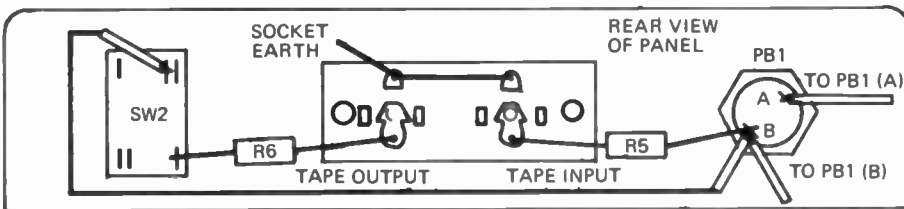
This drawing shows components and wiring on the front panel of the unit.
